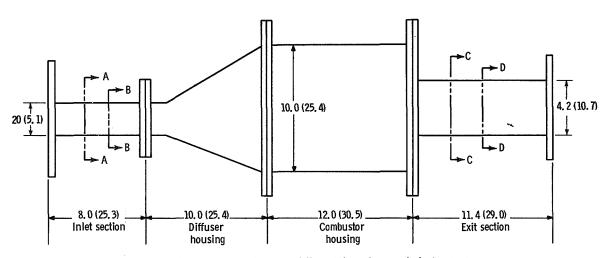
Test section assembly and instrumentation. (Dimensions are in inches (cm).)
